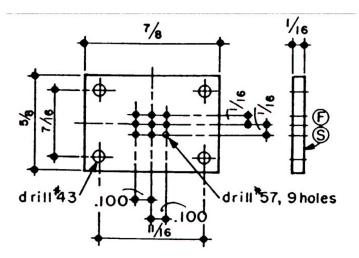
Conventional drawing of valve plate (VERBURG [8])
